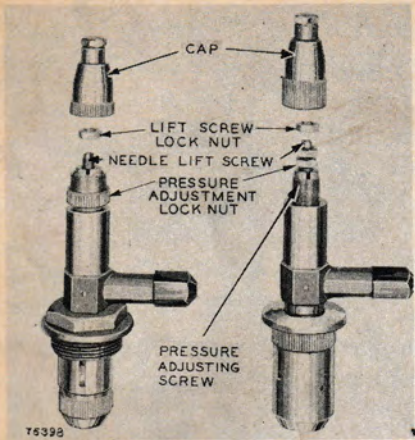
CAPS AND LOCK NUTS REMOVED
